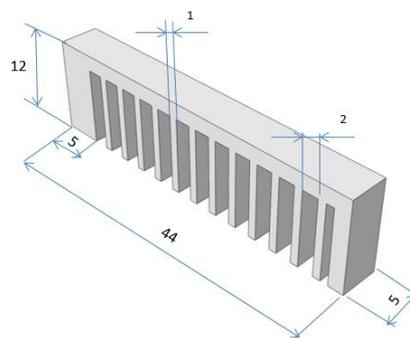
CANTILEVER SHAPE SPECIMEN WITH DIMENSIONS (MM)
